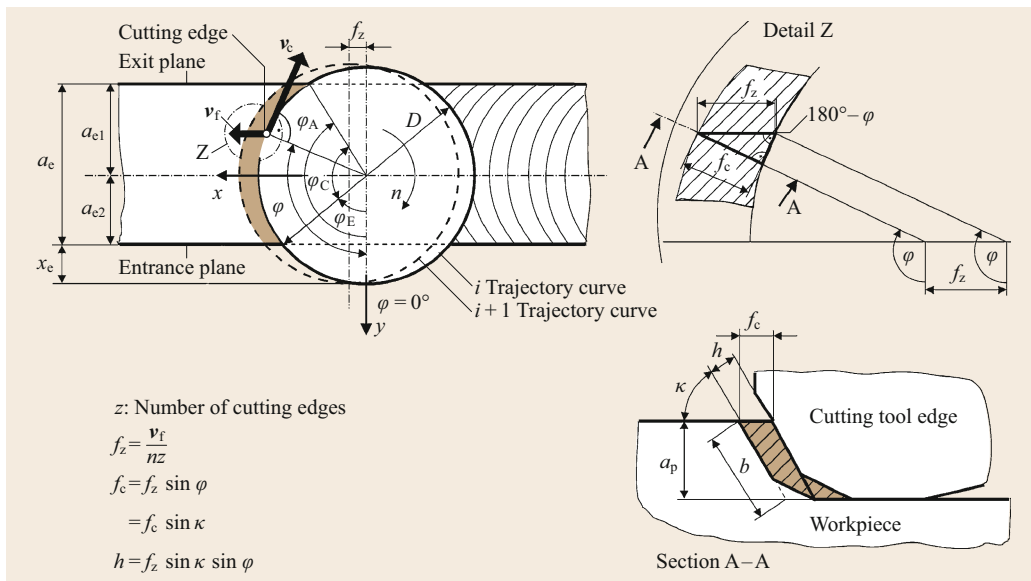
Tool-workpiece engagement variables in plain face milling
